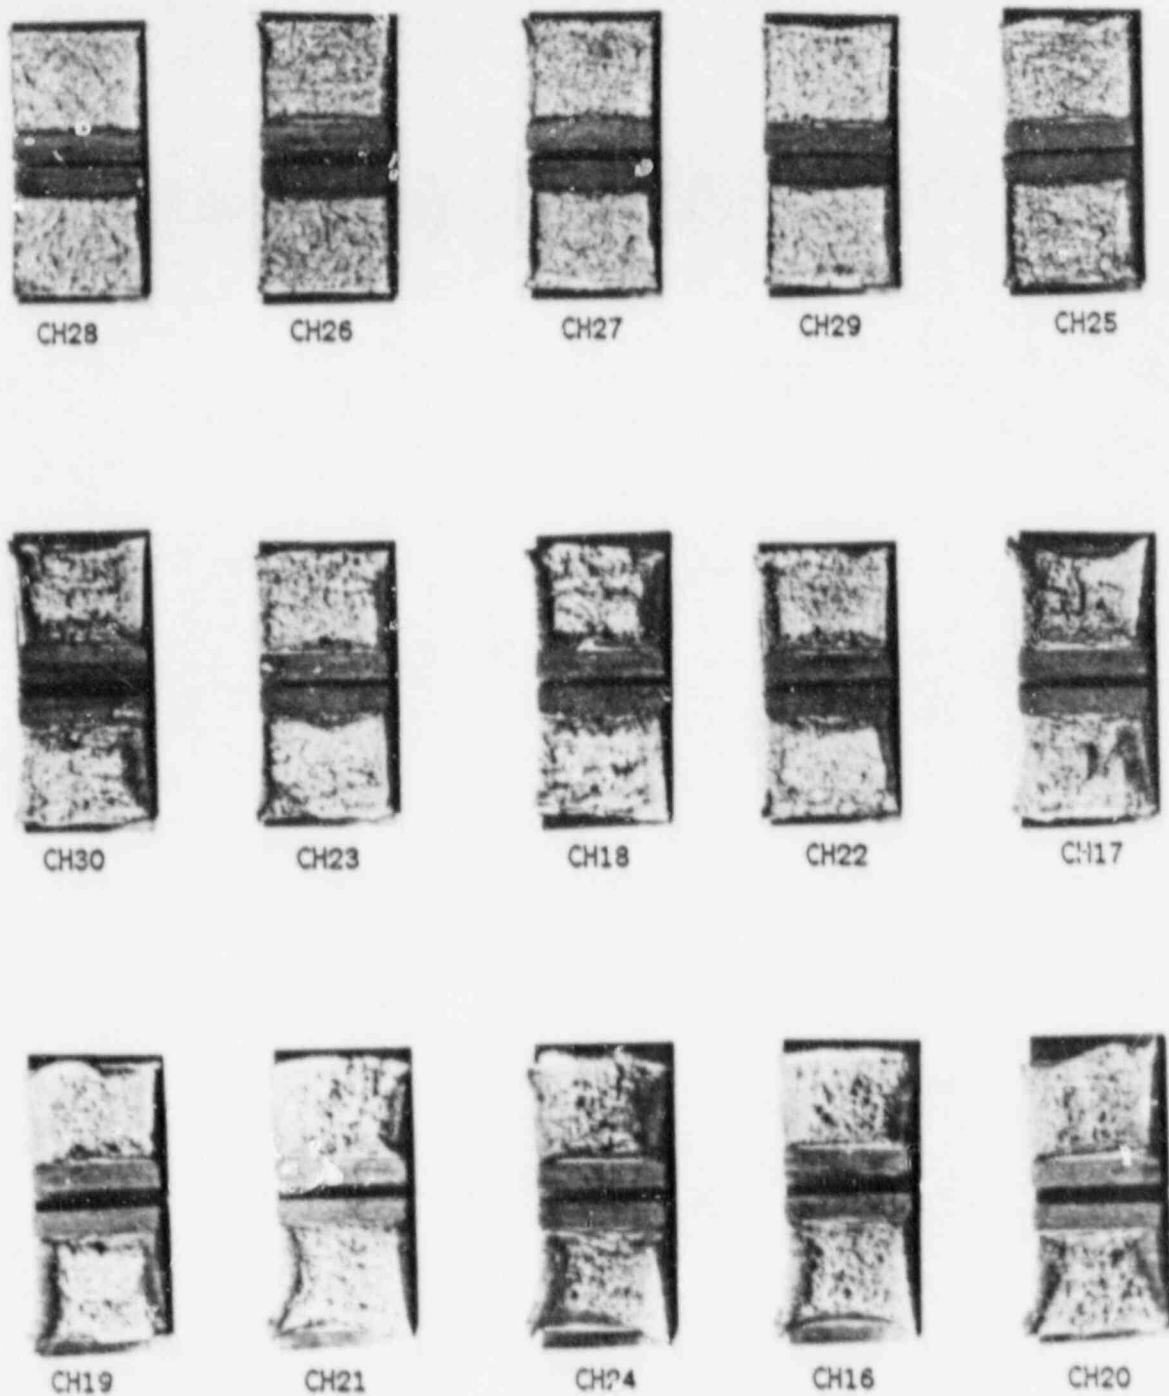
Charpy impact specimen fracture surfaces for V. C. Summer Unit 1 reactor vessel weld heat affected zone metal
